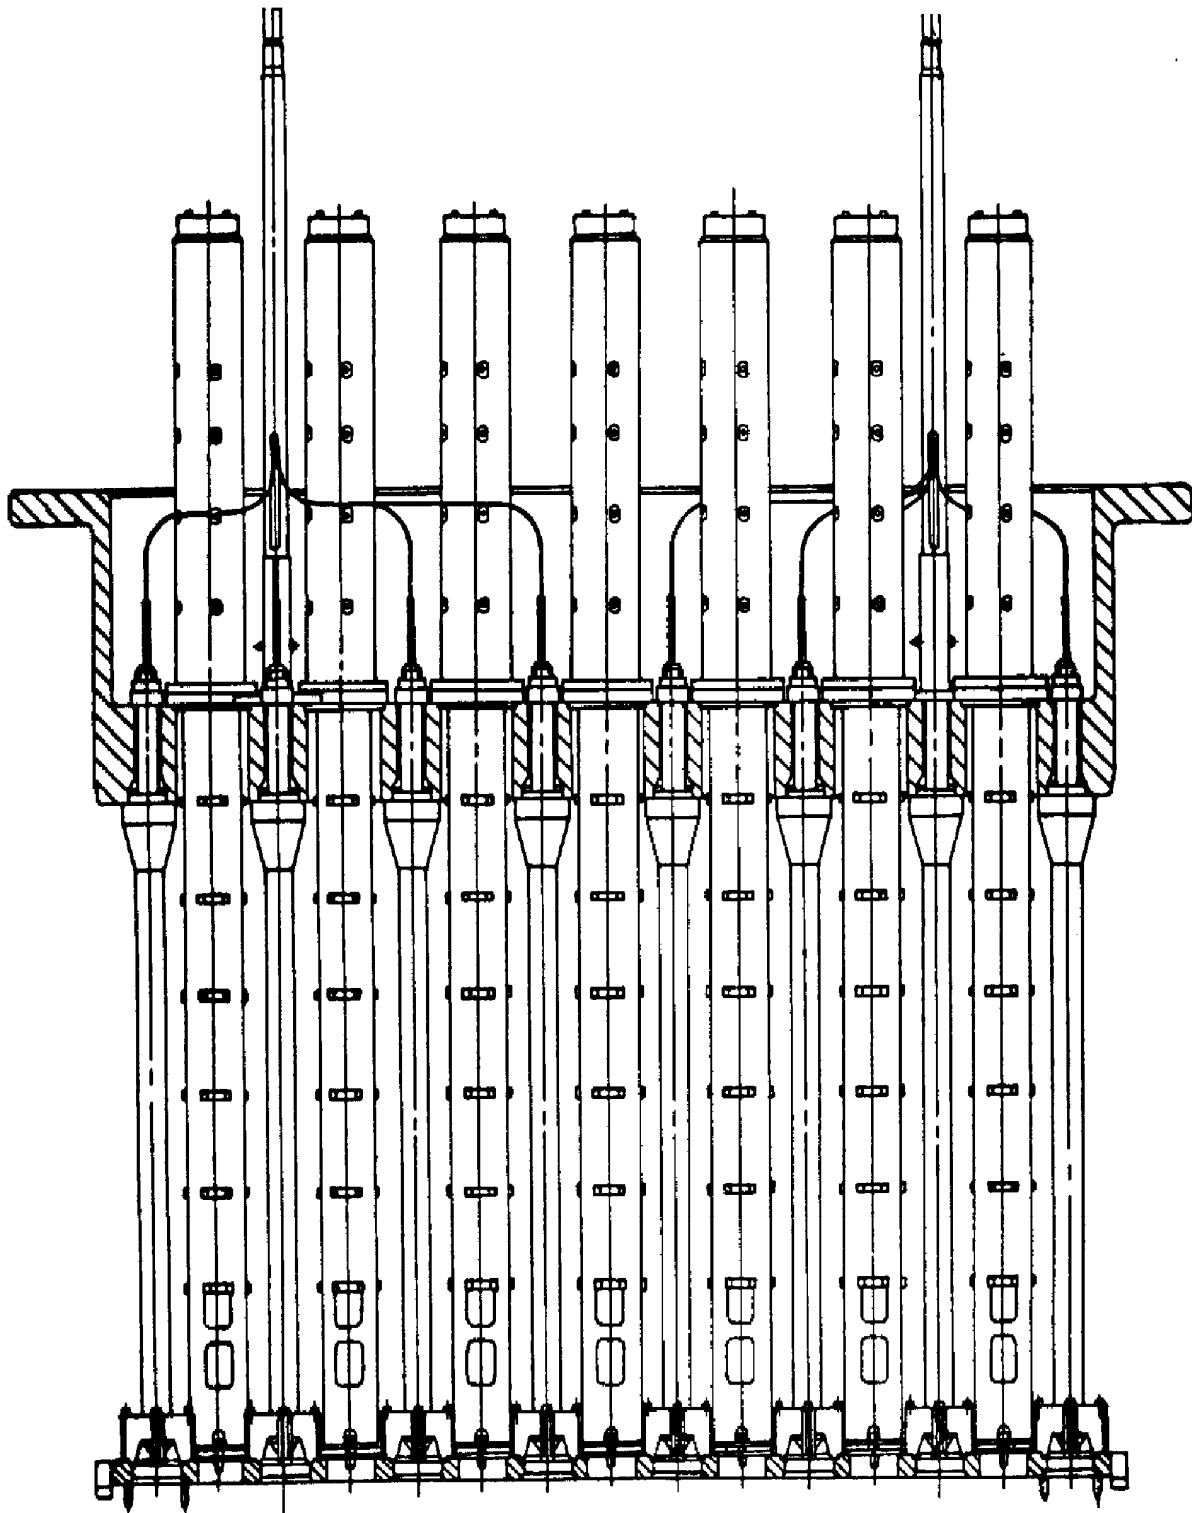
Lower Core Support Assembly (Core Barrel Assembly)
